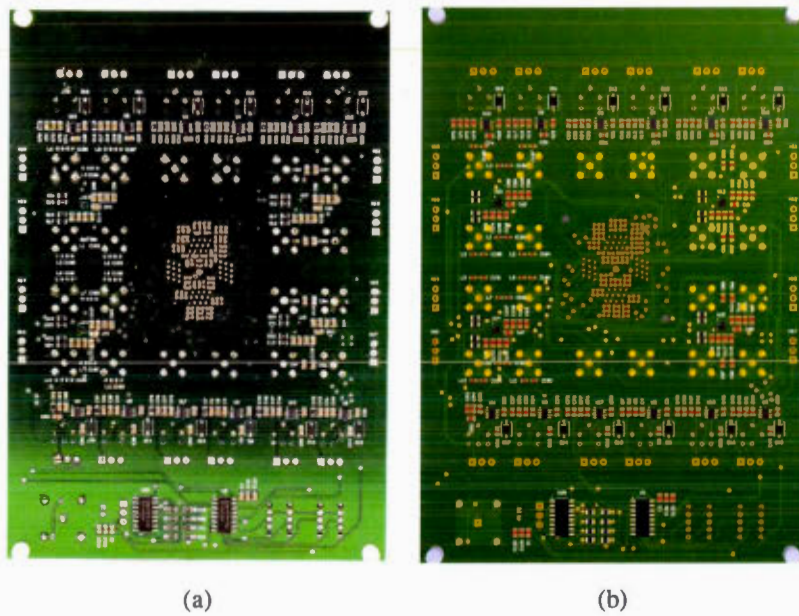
Evaluation board (a) photograph and (b) 3D bottom view.
